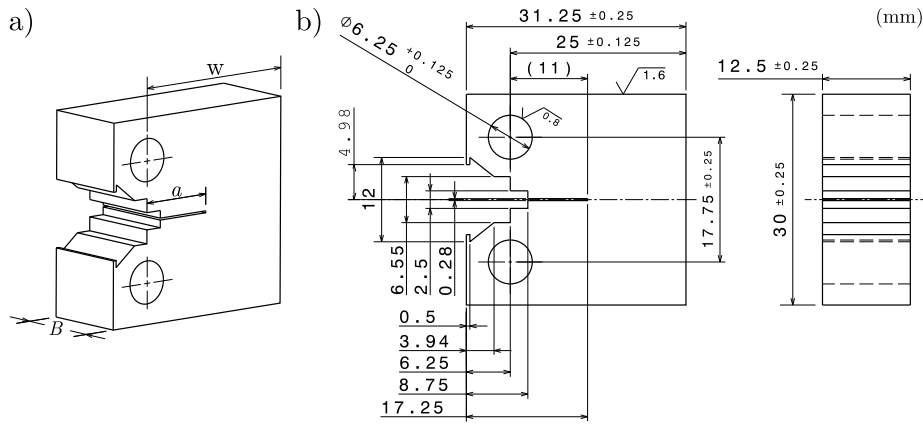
Drawing of the compact tension, CT, specimen tested under isothermal fatigue crack propagation: (a) view showing the parameters W , B , and a ; (b) detailed dimensions of the specimen [18].
